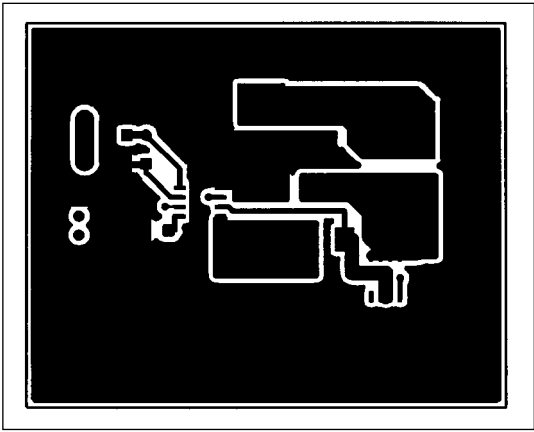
MAX649 EV Kit PC Board Layout—Component Side
